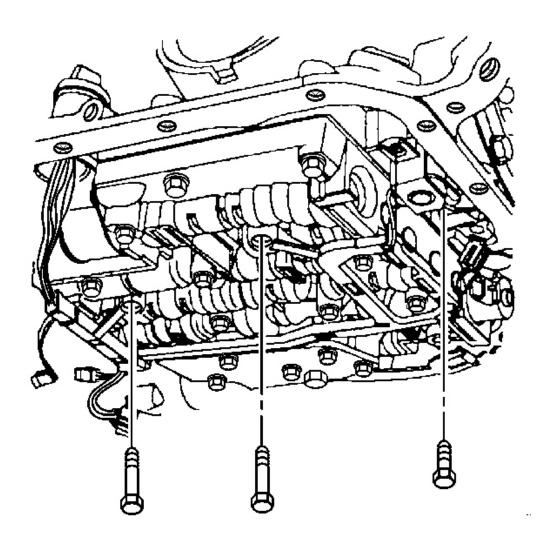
View Of TCC Solenoid & Wiring Harness Courtesy of GENERAL MOTORS CORP.
